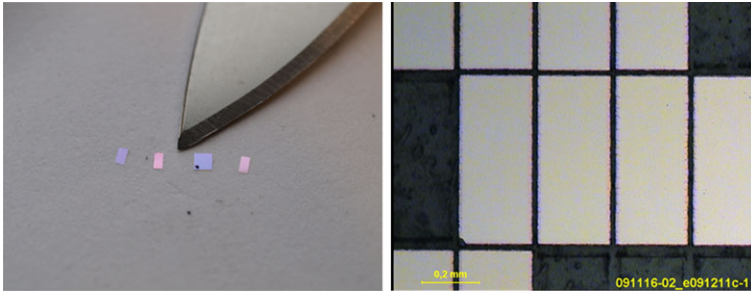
Photographs of TFEs after laser cutting (developed and fabricated in collaboration of Laser Zentrum Hannover, Hanover, Germany and Fraunhofer HHI)
